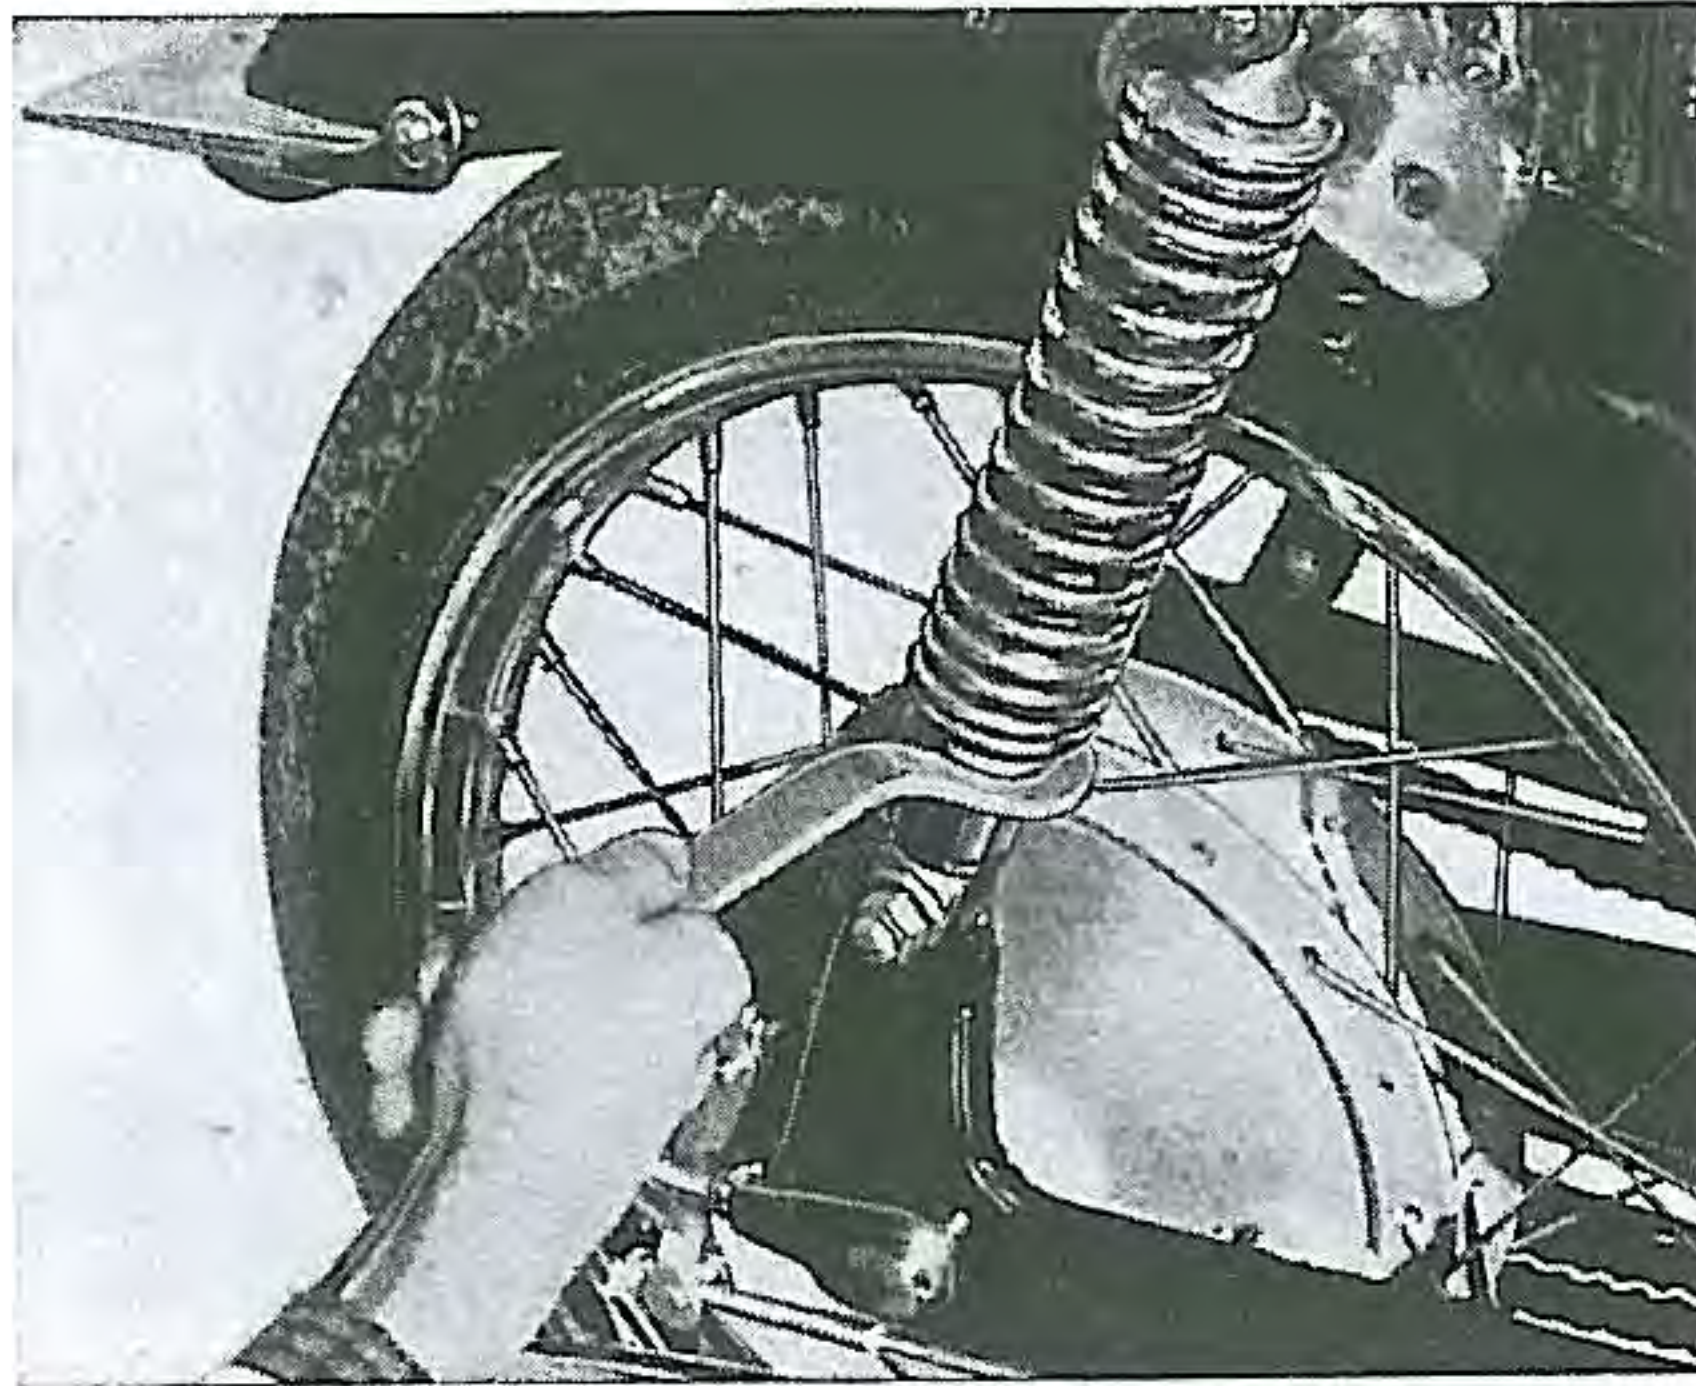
Adjusting tension of rear shock absorber spring (CB92)
